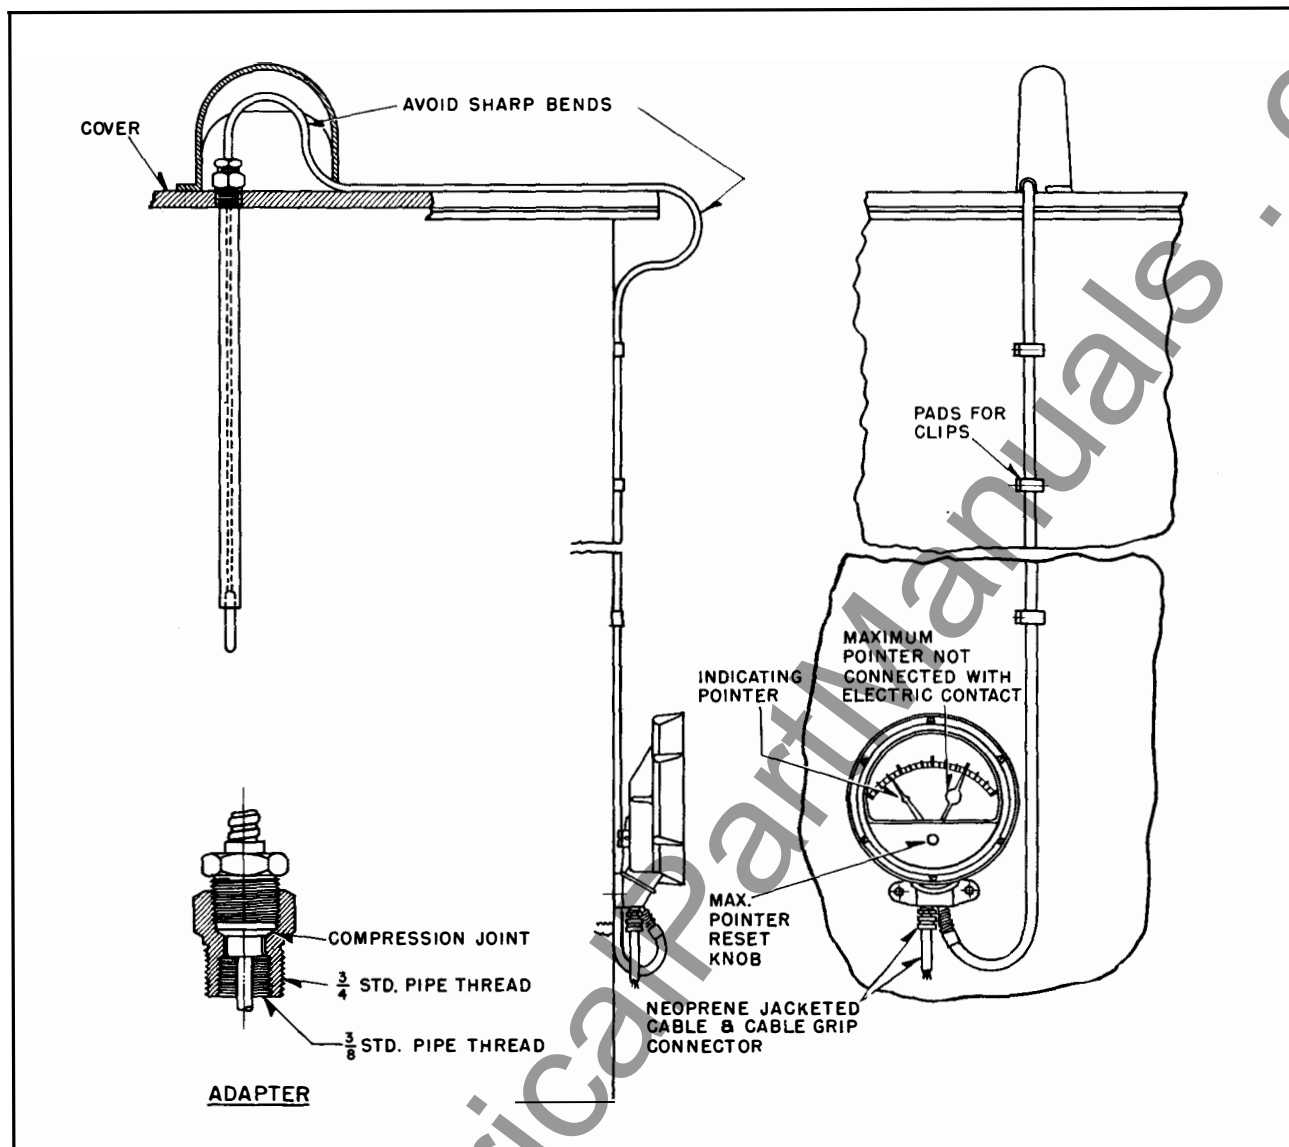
Sectional View of Transformer Showing Mounting of Thermometer with Flexible Tube and Alarm Contacts.
